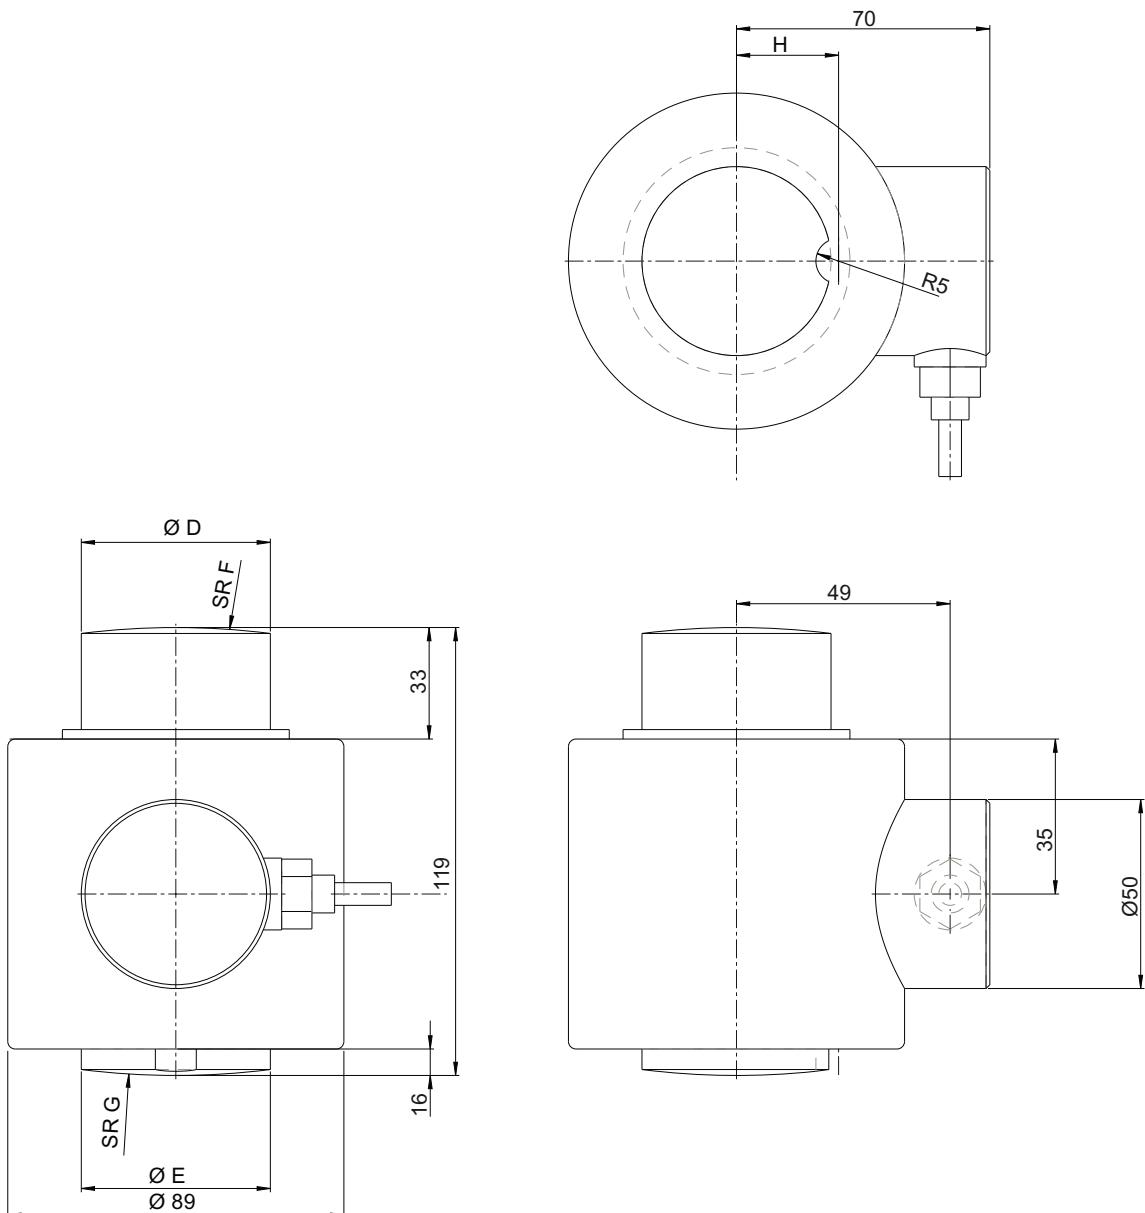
SIWAREX WL270 CP-S SA dimension drawing
